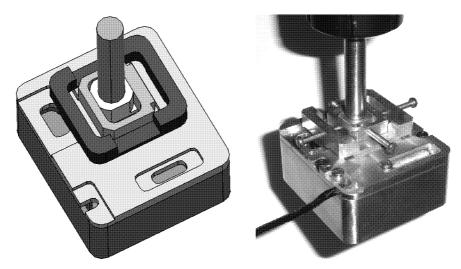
Device for feed-rate measurement (left – CAD model, right – finished device)
